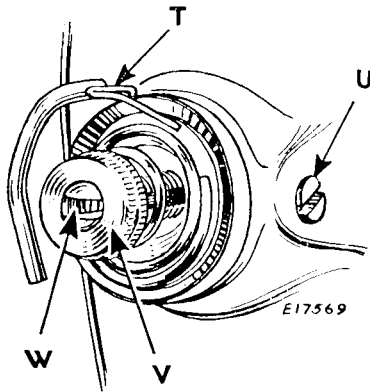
TIMING AND ADJUSTMENT OF THREAD TAKE-UP SPRING
